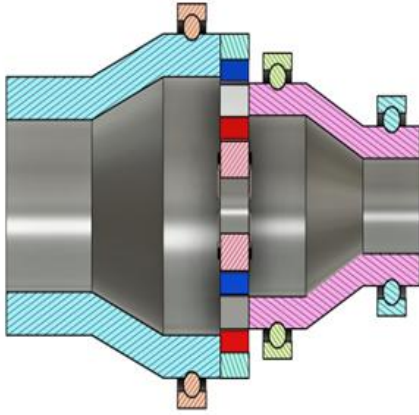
Magnetic gear configuration with motor connected to the inner rotor output & Engine to Modulator.
